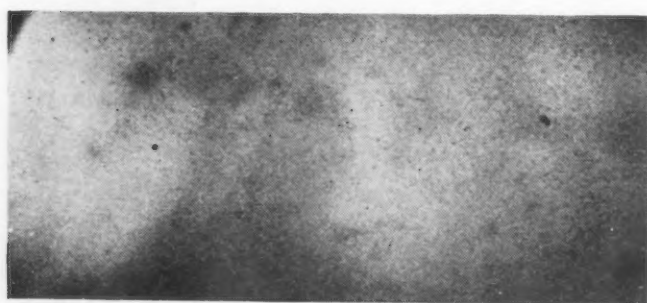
Radiograph of a thick weld. Porosity is indicated by black dots.
